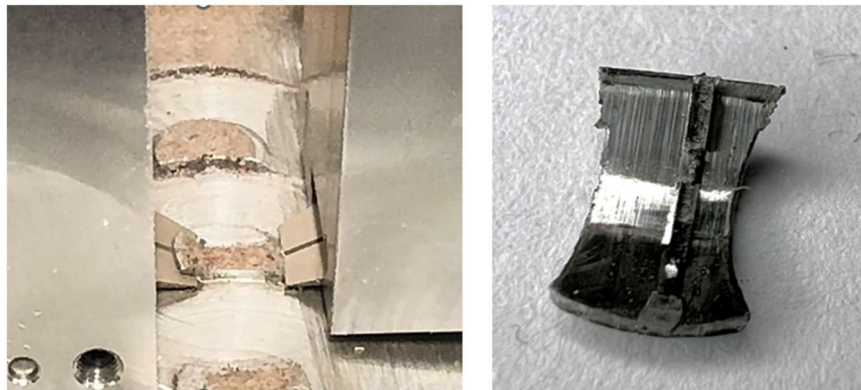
Left – Opposite Facing Cutting Blades Engaged with a Test Island; Right – Resulting chip
